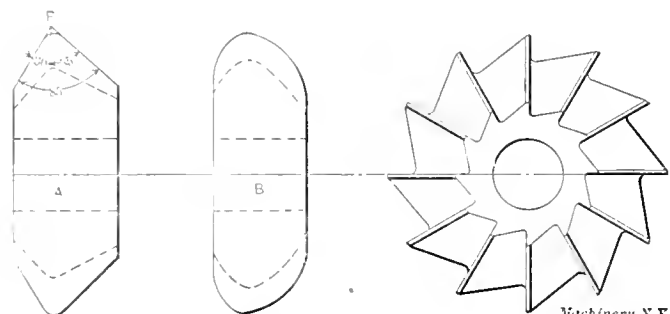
Shape of Regular Tap and Formed Fluting Cutters.
